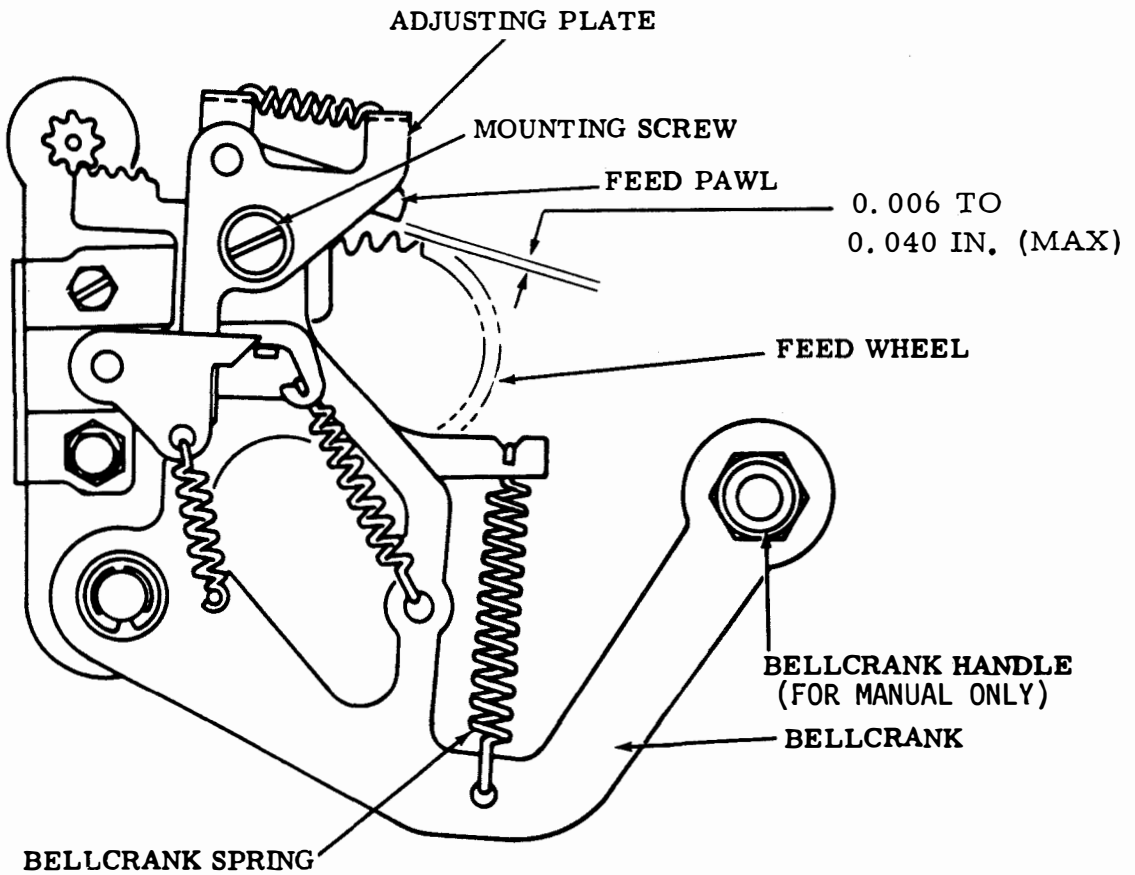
Feed Pawl Adjusting Plate (Preliminary and Final), Perforator
